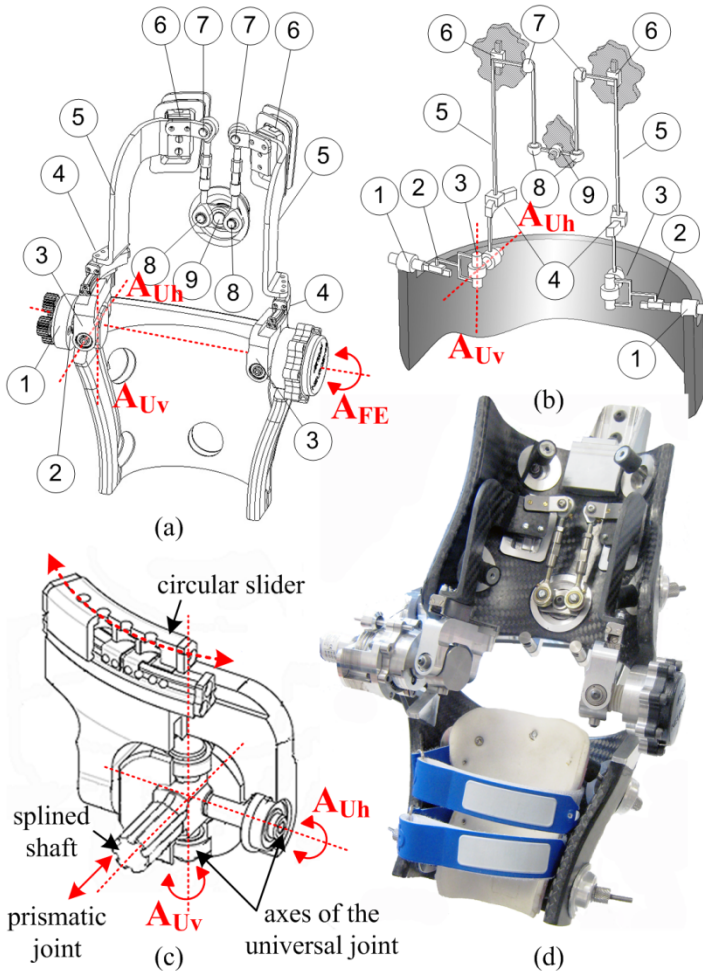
4-DOF passive mechanism. (a) CAD and (b) layout of the passive mechanism. (1) NEUROExos flexion–extension joint, axis A_{FE} . (2) Prismatic joint through splined shaft. (3) Universal joint. (4) Circular slider. (5) Carbon fiber link. (6) Linear slider. (7) Spherical joint. (8) Spherical joint. (9) Rotational joint. (c) Zoom on joints (1), (2), (3), and (4). A_{Uv} and A_{Uh} are the vertical and horizontal rotational axes of the universal joint; the splined shaft allows for the prismatic joint (2) whose axis coincides with A_{FE} (d) Implementation of the passive mechanism. © 2013 IEEE. Reprinted, with permission, from Vitiello et al. (IEEE Transactions on Robotics 2013).
